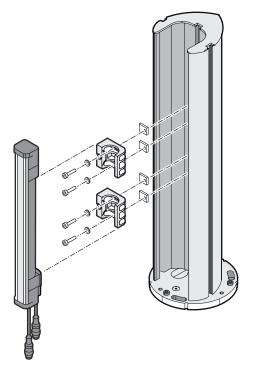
Mounting the FlexFix bracket to a device column (accessory)
